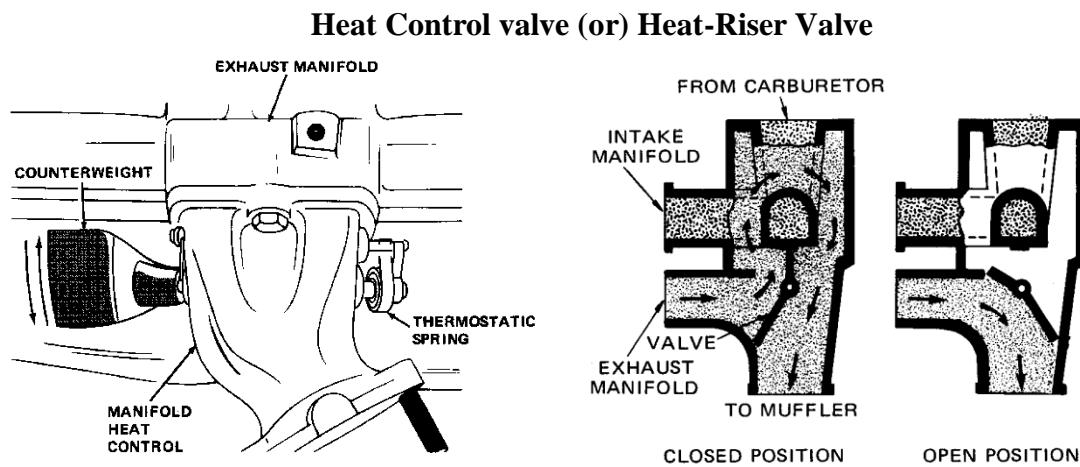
Heat Control valve (or) Heat-Riser Valve
